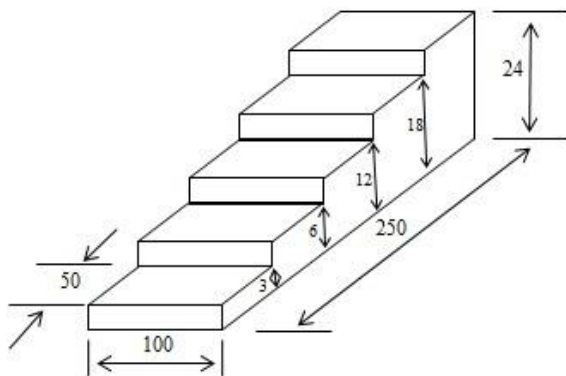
View of Lost Foam Casting model dimensions (mm)
